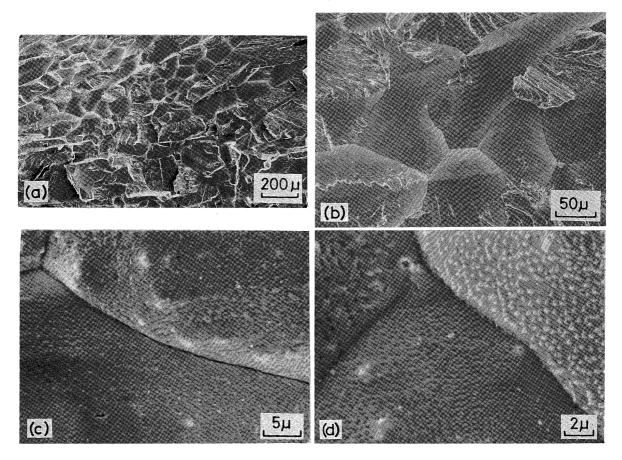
SEM photographs for fractured surface of weld metal fractured at 0°C (material: AM-TZM, EBW: 80 mA, 40 kV, 1000 mm/min)
